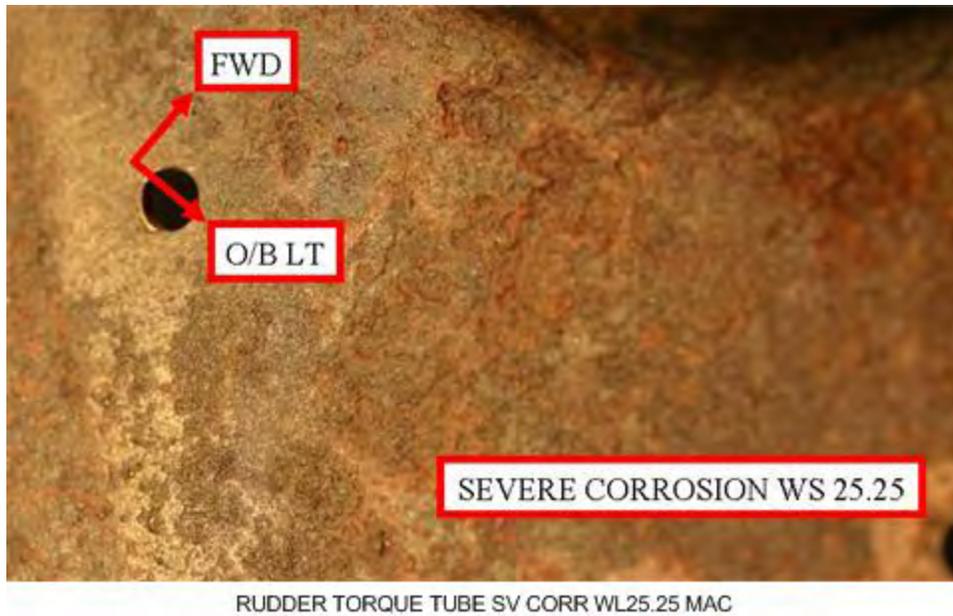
Microscopic View of Severe Corrosion on the Rudder Torque Tube Assembly WL 25.25
